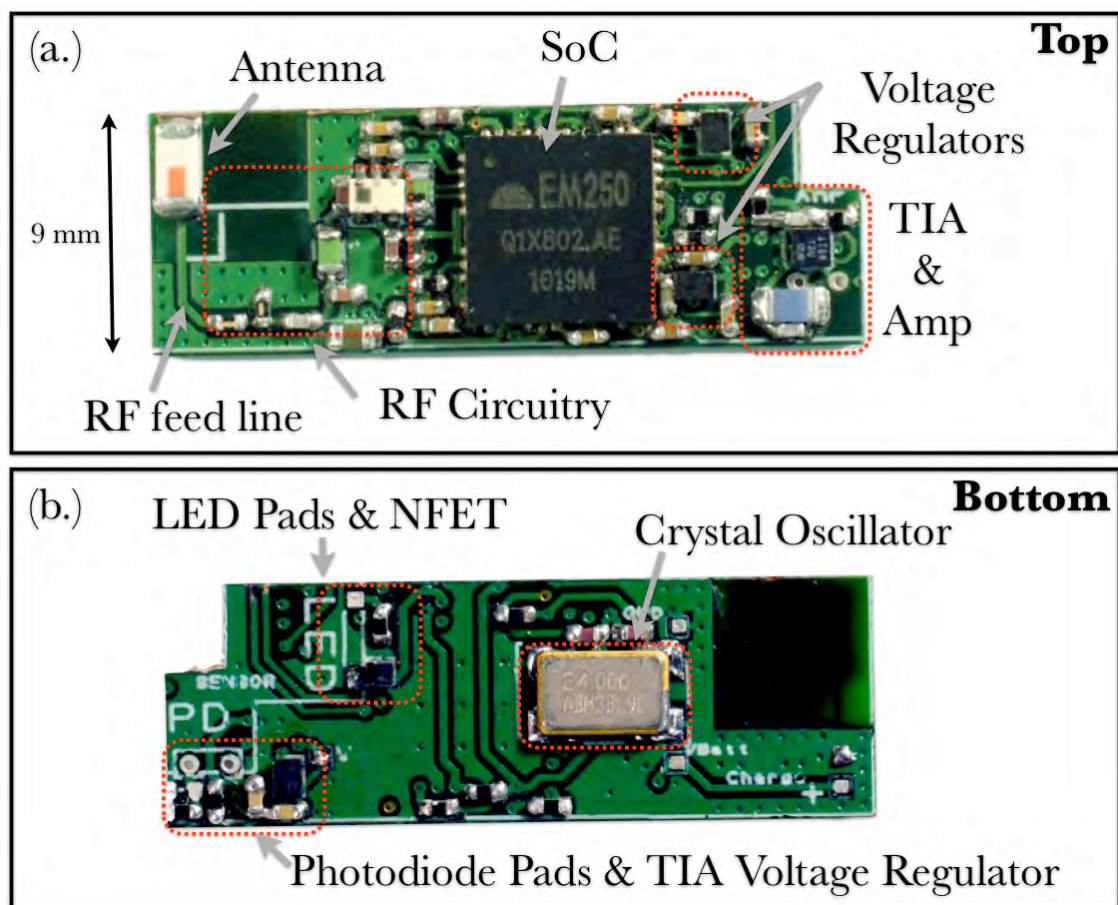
(a.) Top view of the assembled and cut PCB. (b.) Bottom view of the PCB.
